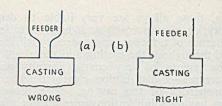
(a) Incorrect and (b) Correct Methods of Attaching a Feeder Head to a Casting.
